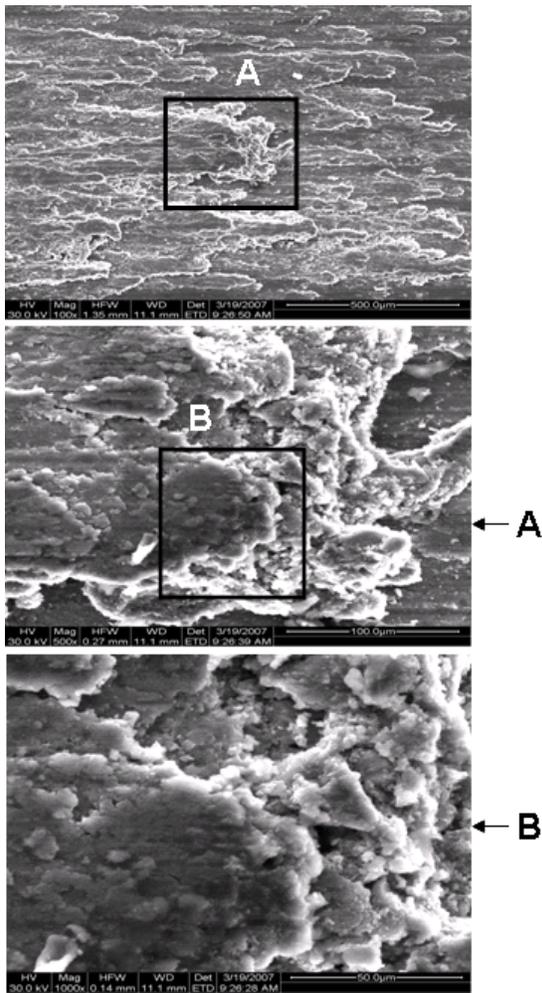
Typical Surface texture of ground MMC, while grinding with resin bonded wheel
